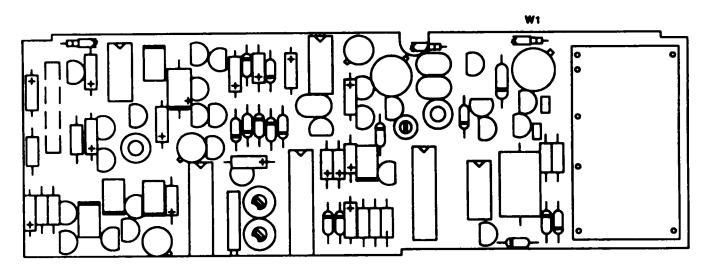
A6A2 Synthesizer PWB Assembly Component Location Diagram (10303-2720 Rev. A)
